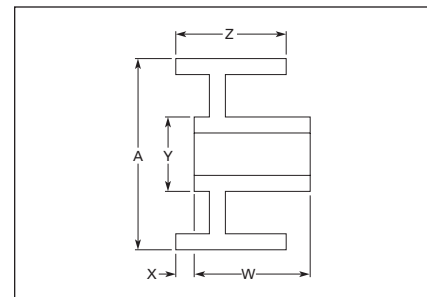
Standard Brake Wheels — Approximate Dimensions
